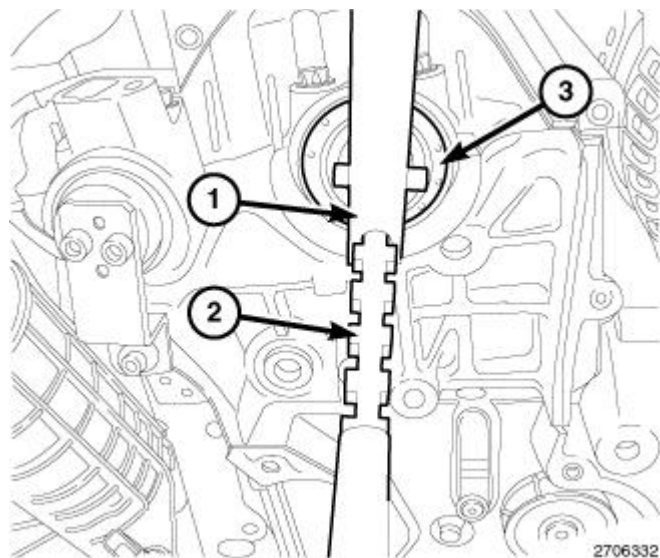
Identifying Seal Remover Handle, Seal Remover & Intake Camshaft Oil Seal
